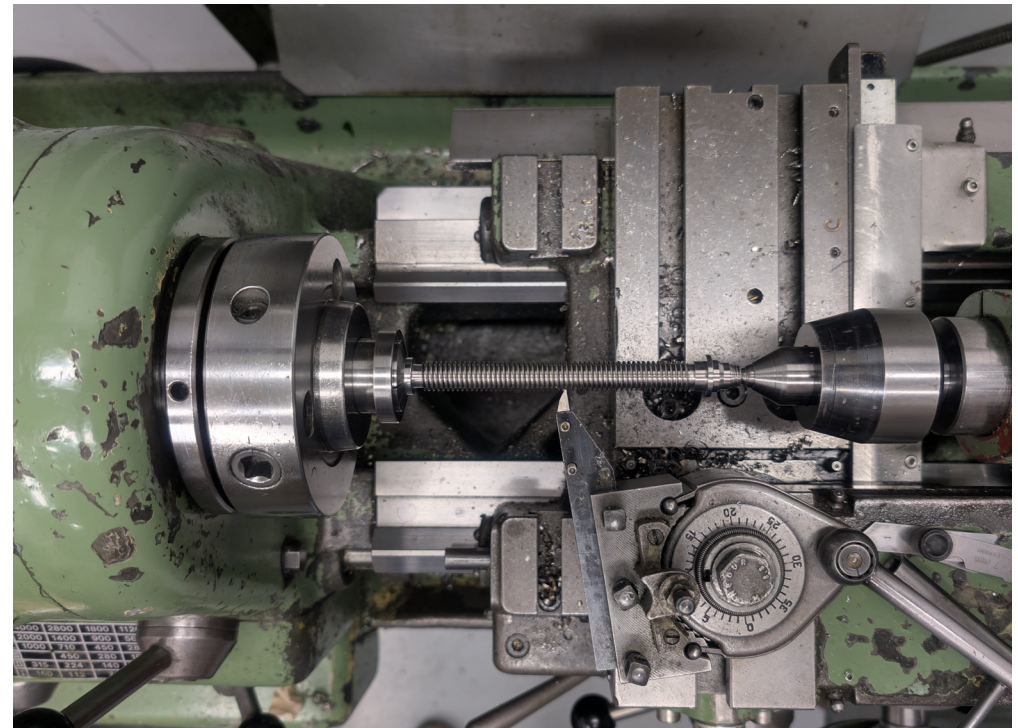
The cutting tool, at its second position (angled) to cut the other part of the thread.
